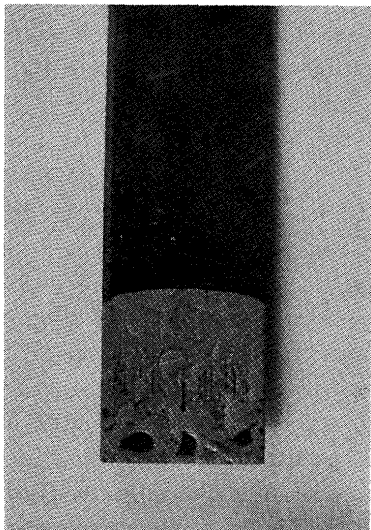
Typical non-wetted parts appeared on surface of specimen
